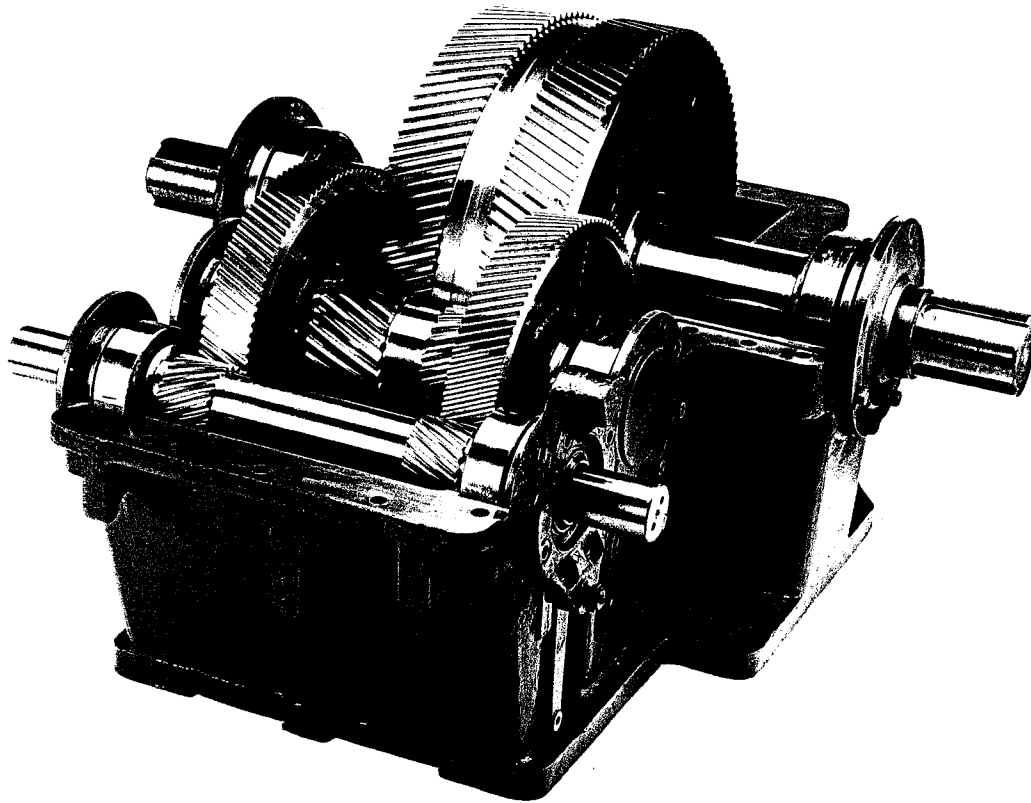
Double Reduction, Double Helical, Double-Circular-Arc Gear Oil Well Pumping Unit.
